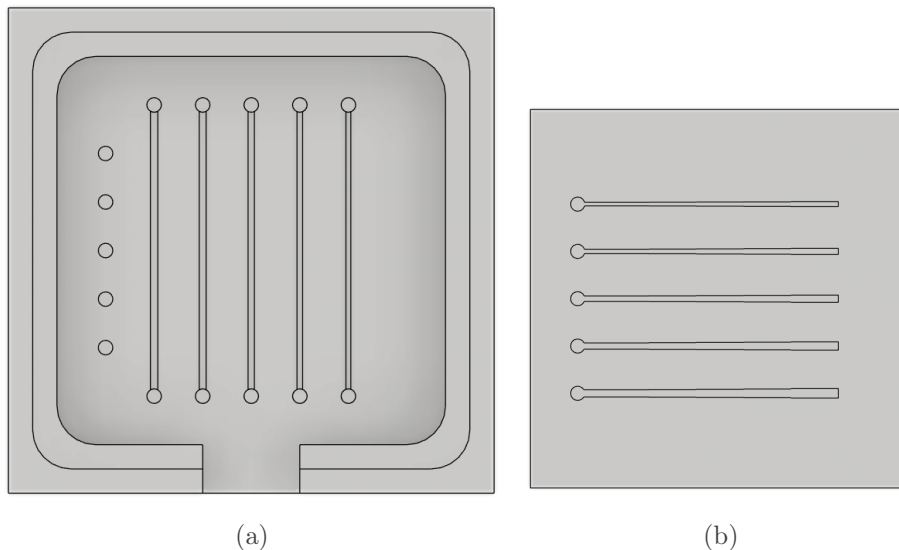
Top view of the moulds used to create the valve test chip. A) the mould used to make the flow layer has a basin into which PDMS can be easily poured. B) the mould used to make the control layer is mostly flat, allowing for spin coating.
